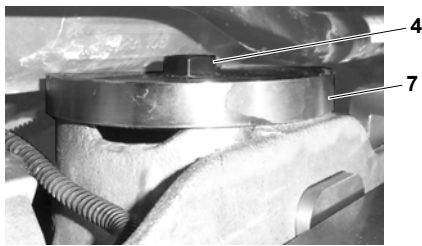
Retainer adaptor, spacer ring, pressure piece.
